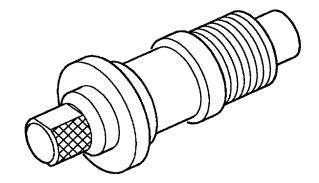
Setting Up to Machine I.D. of Any Bushing or Lug Hole in Upper Row (Sheet 2)
